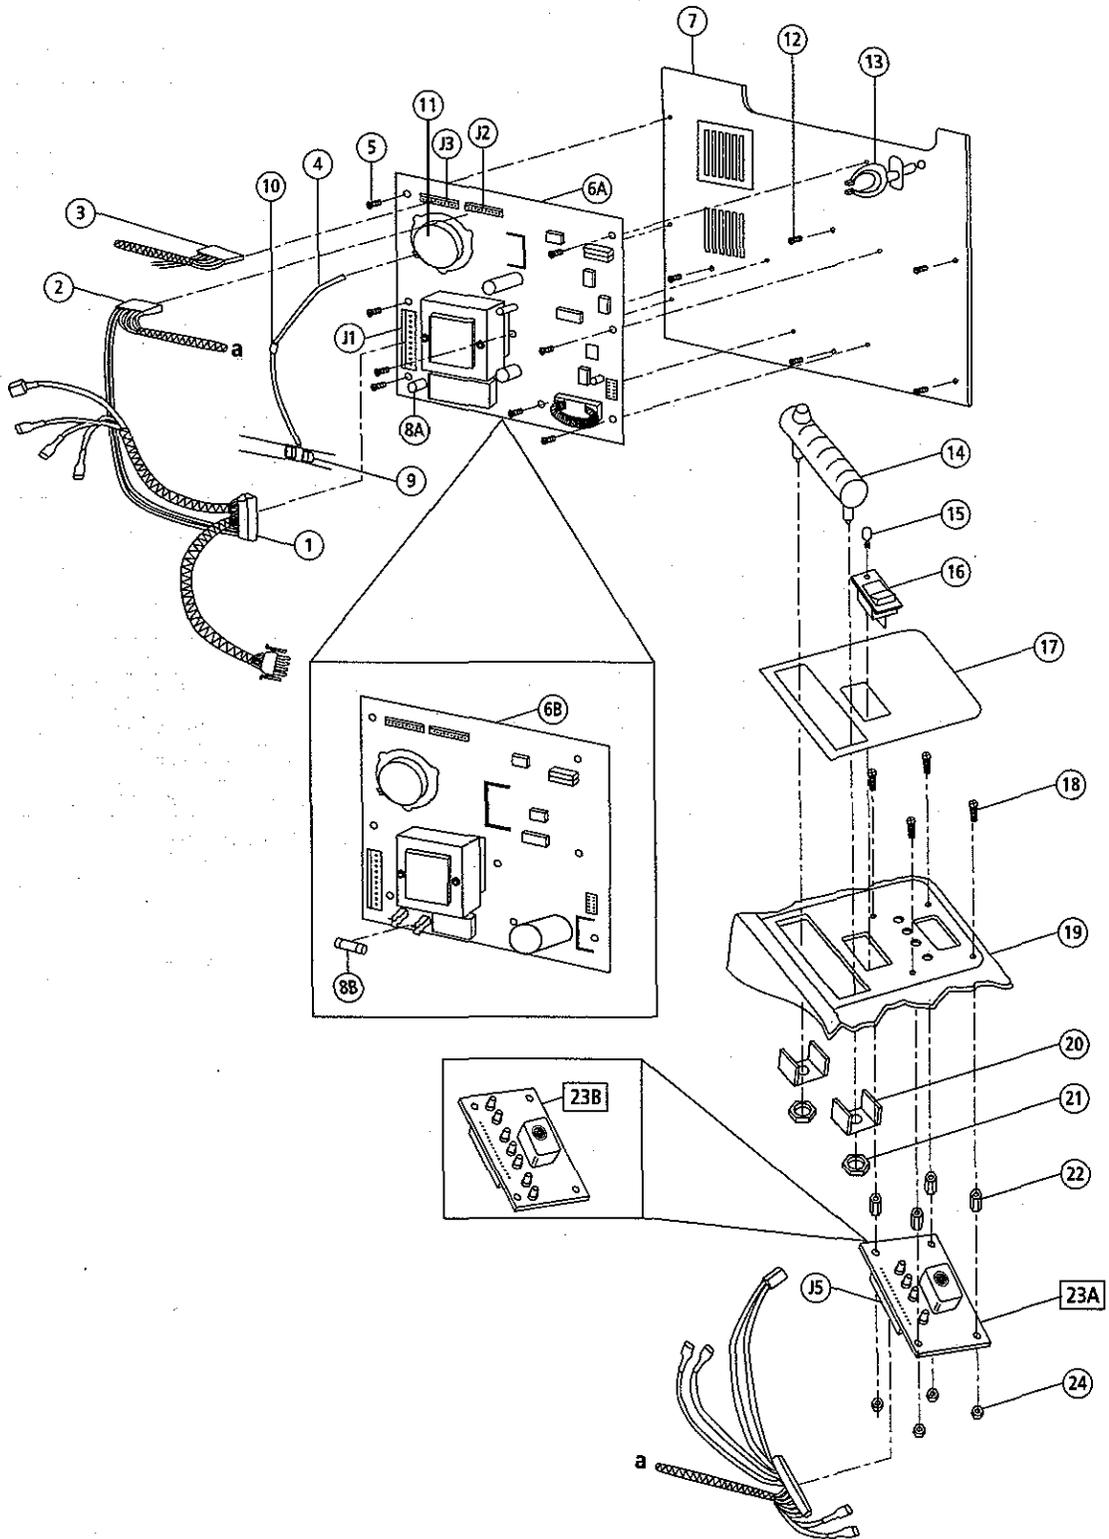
Control/OCI PCB with Removable Sensor and Control Panel
